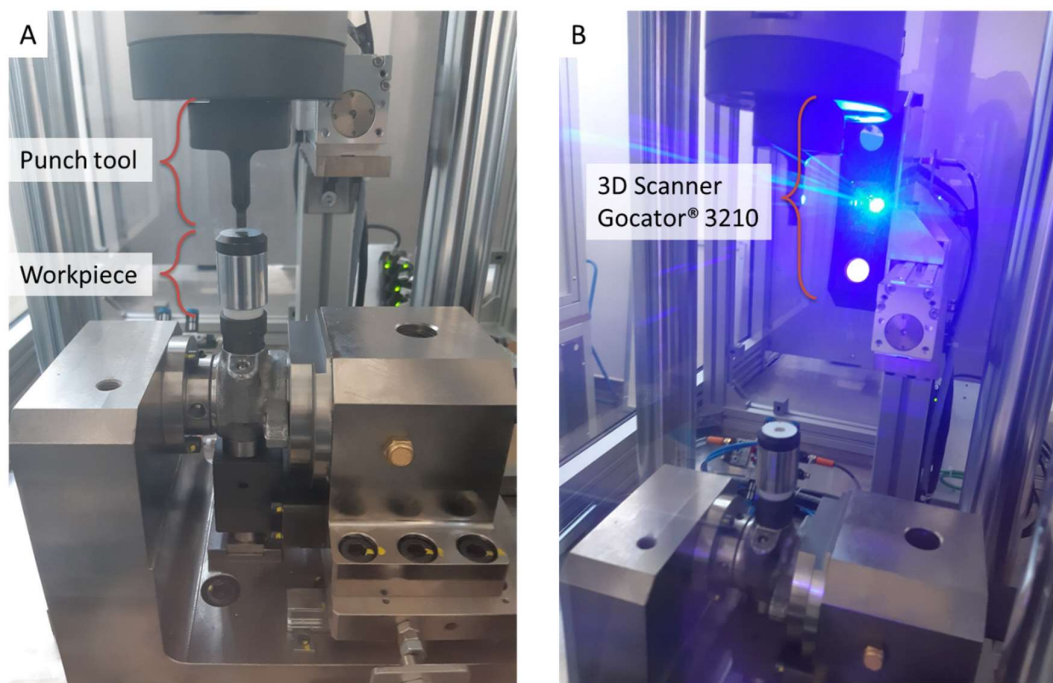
Punching machinery: A) punch tool and pump workpiece, B) Gocator® 3210 3D scanning sensor.
